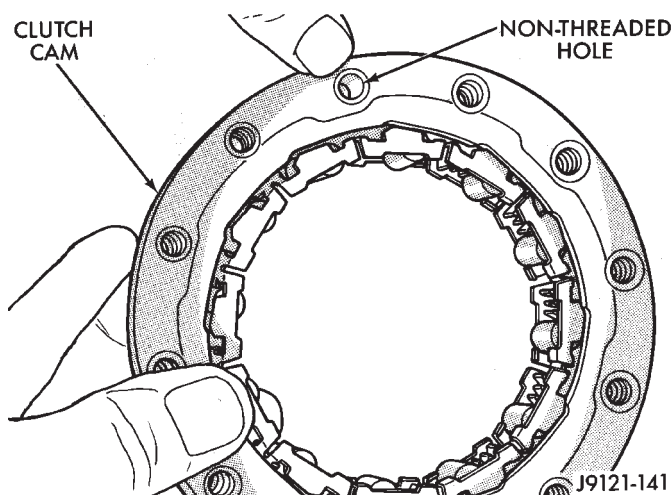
Location Of Non-Threaded Hole In Clutch Cam
